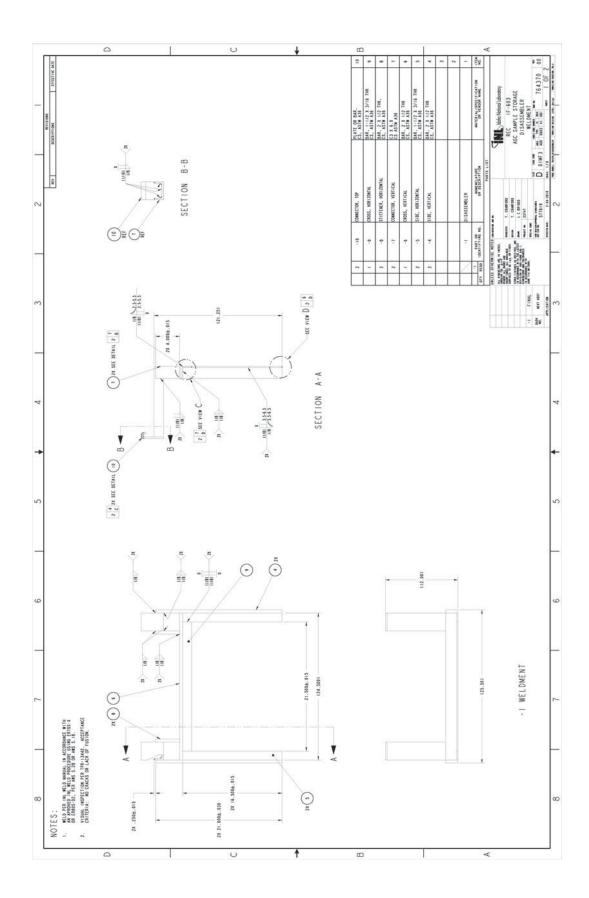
, 601164 and 764370 Illustrating CCL Irradiated Sample Storage Cabinet
